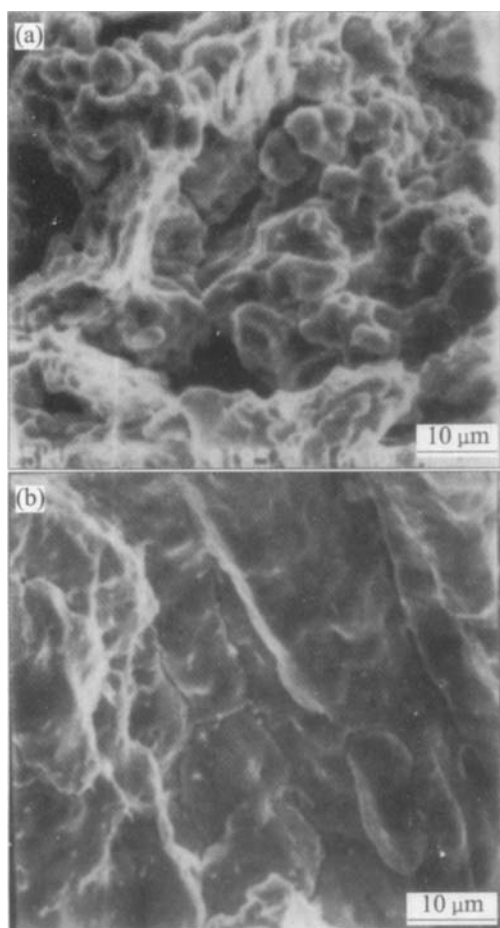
Fracture morphologies of weld metal at elevated temperature: (a) 5083 alloy; (b) 6082 alloy
